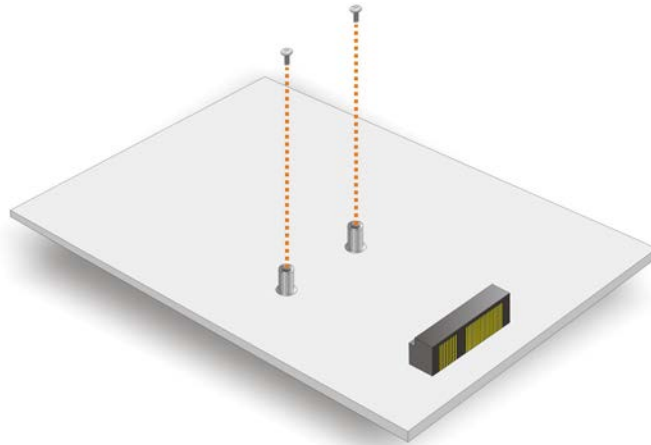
Remove the Retention Screws for the PCIe Mini Card
